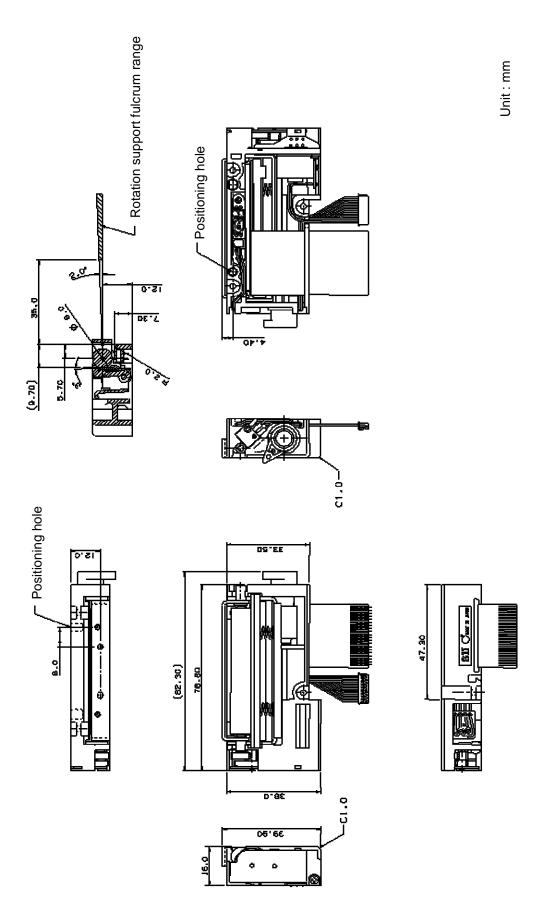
Appearance and Dimensions (LTPH245D-C384-E)
